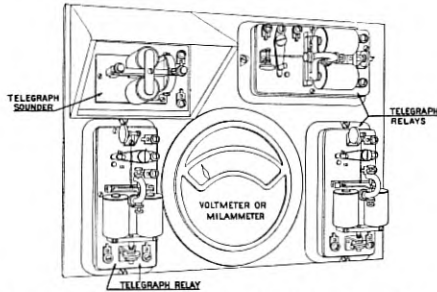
Typical Assembly of Apparatus Panel for Panel Mounted Test Board
